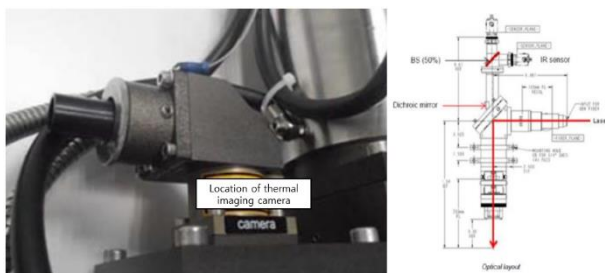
CS-mount camera port in a TRUMPF Laser TruDisk BEO D70 welding head (example)
